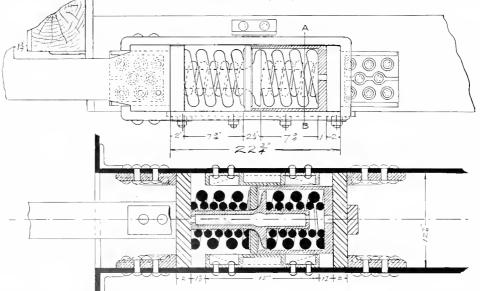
Butler Friction Draft Gear, Piper Patents, Applied to Car with Steel Center Sills.
